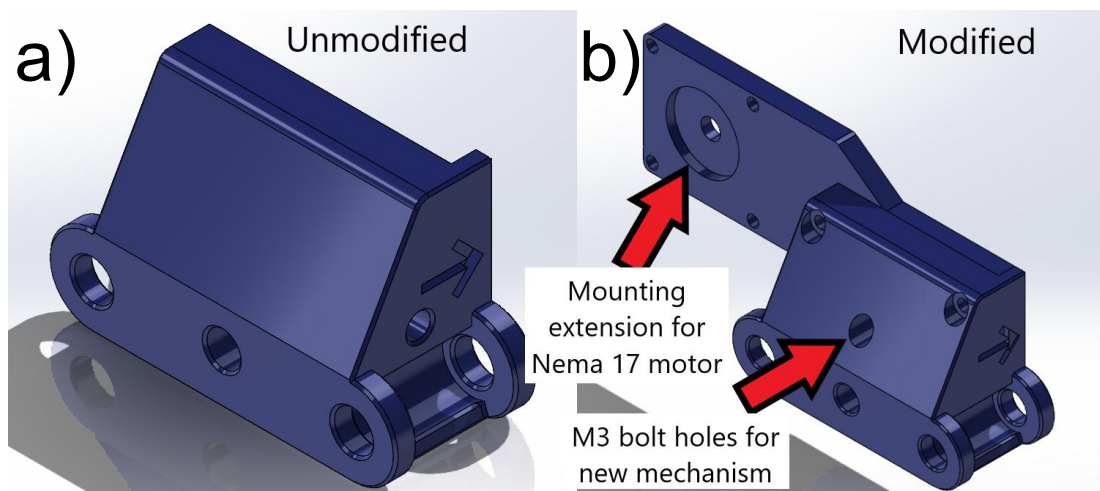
Changes made to the carriage of the Poseidon Syringe Pump [77] as shown in a), which has three M3 bolt holes added to support a new mechanism and an extension of the left side to bolt on a Nema 17 stepper motor while allowing its motor shaft to go through as shown in b).
